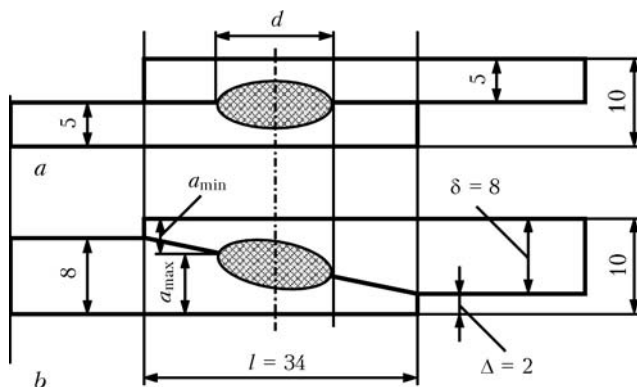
Schematics of welded joints made by resistance spot welding without (*a*) and with edge preparation (*b*)
